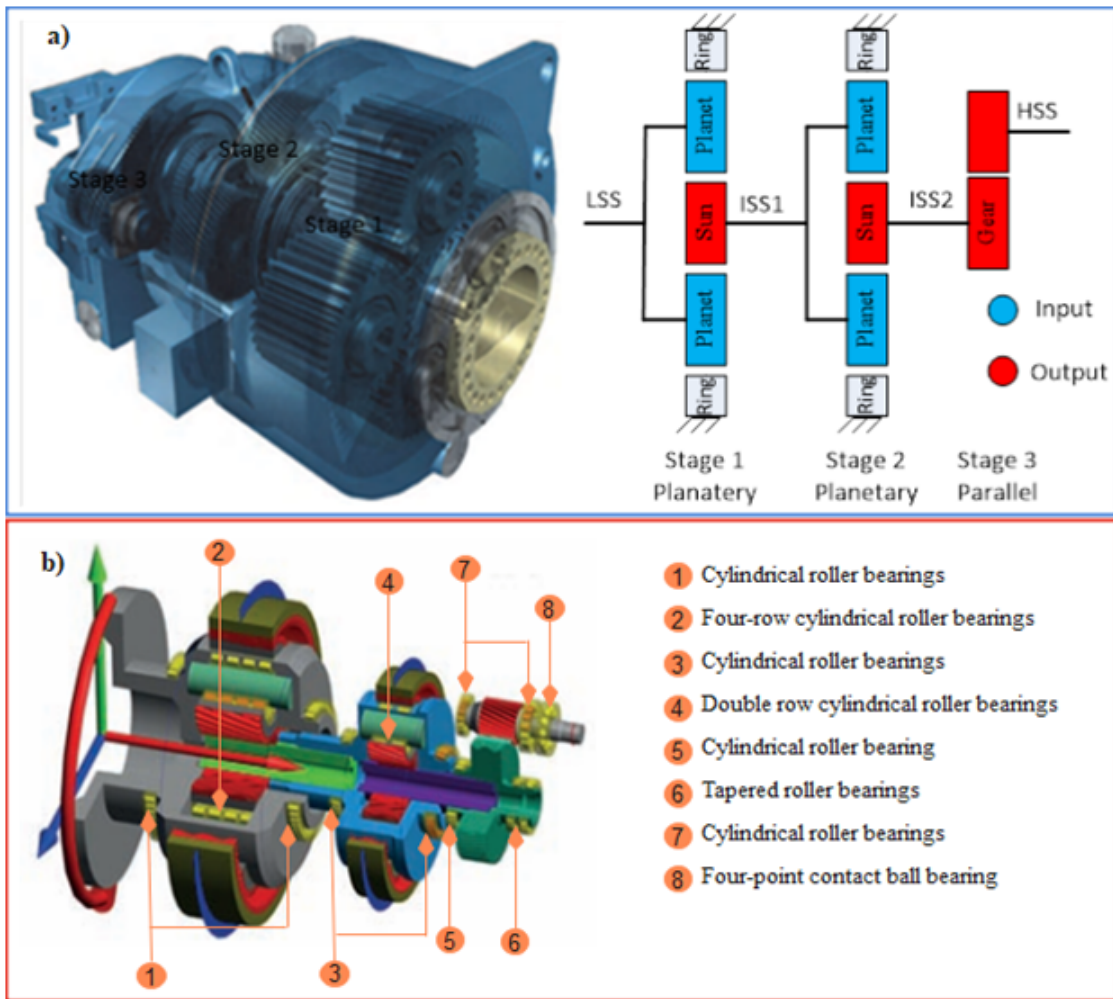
Considered wind turbine Gearbox: (a) two-stage planetary and one-stage parallel [123] and (b) bearings setup.
